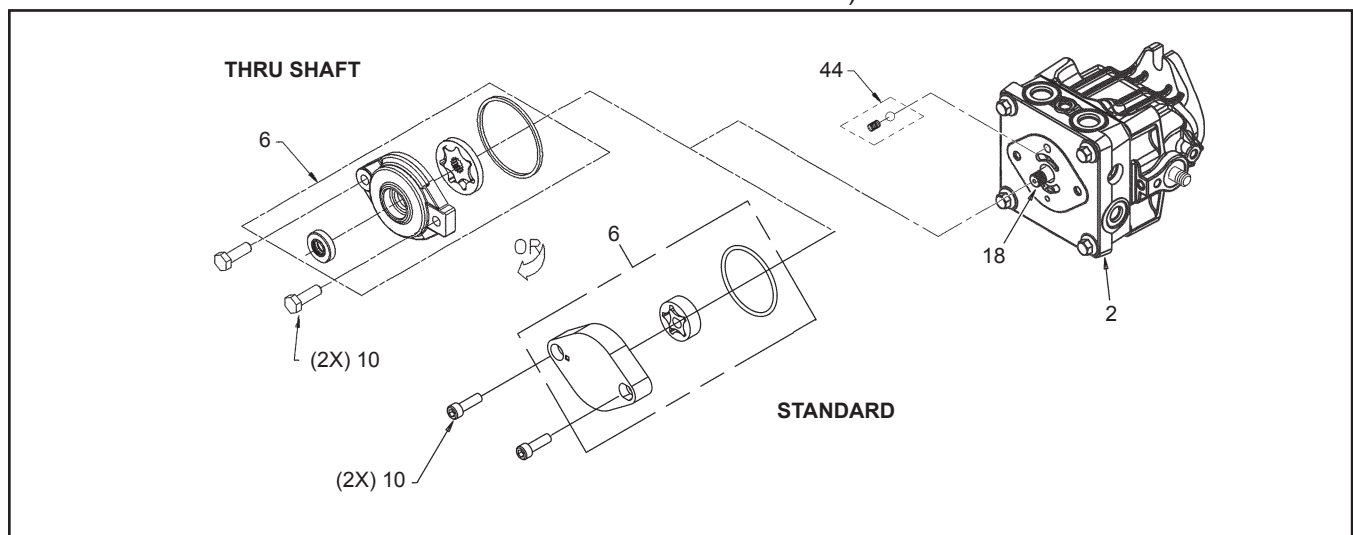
PG / PE Pump Standard or Thru Shaft Charge Pump
